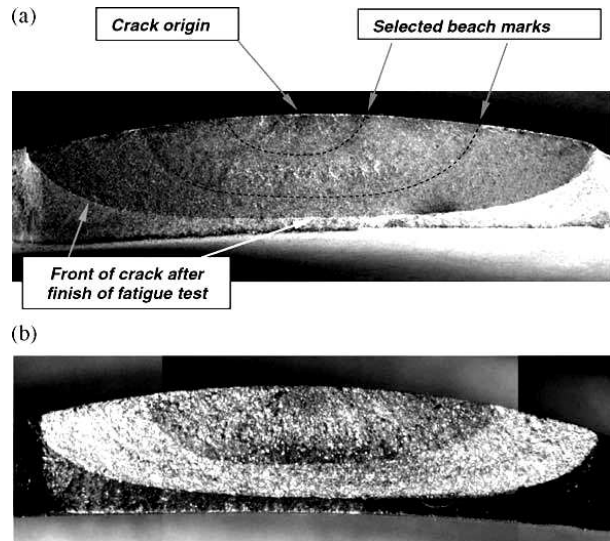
Shape of crack front in advanced phase of fatigue (8×10^5 cycles), (a) optical view (b) microscope view [11]
